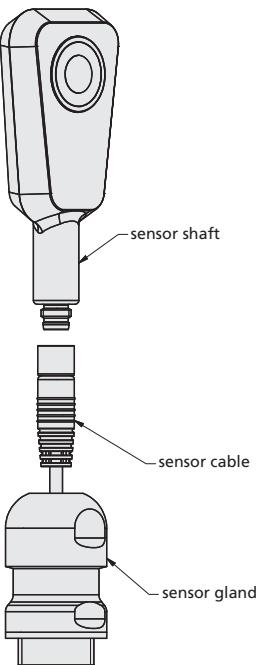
Mounting of pms sensor with sensor screw connection BF-pms/A1
